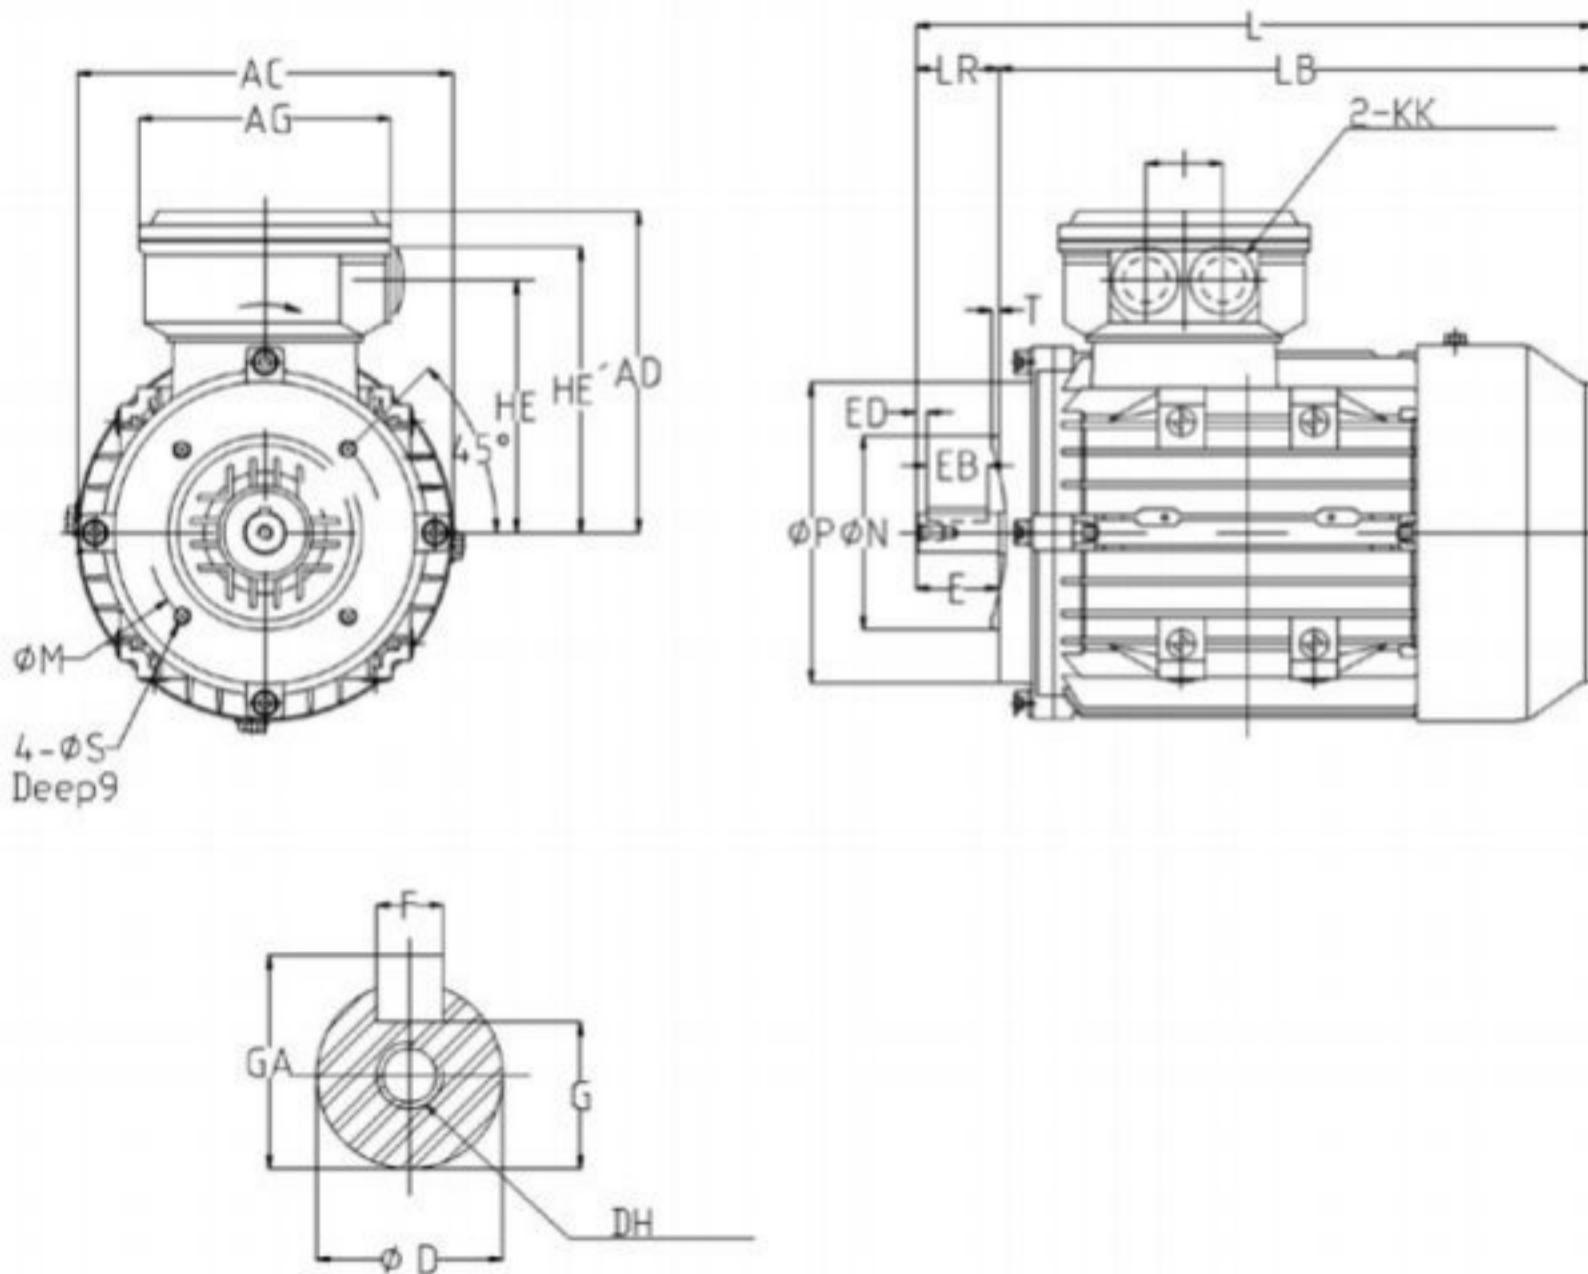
Outline drawing of aluminium design, face version, mounting B14, frame size 63 – 160 (sample)
